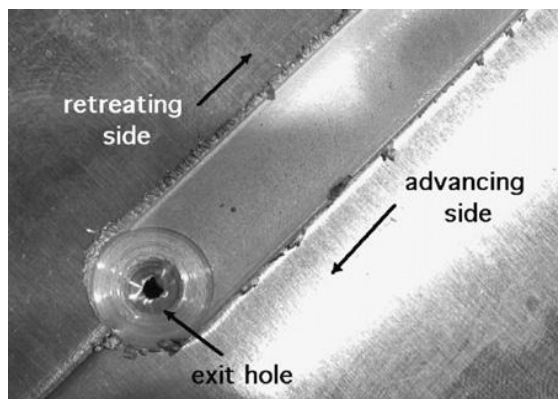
Schematic of two sides of Friction Stir Welds [2]
